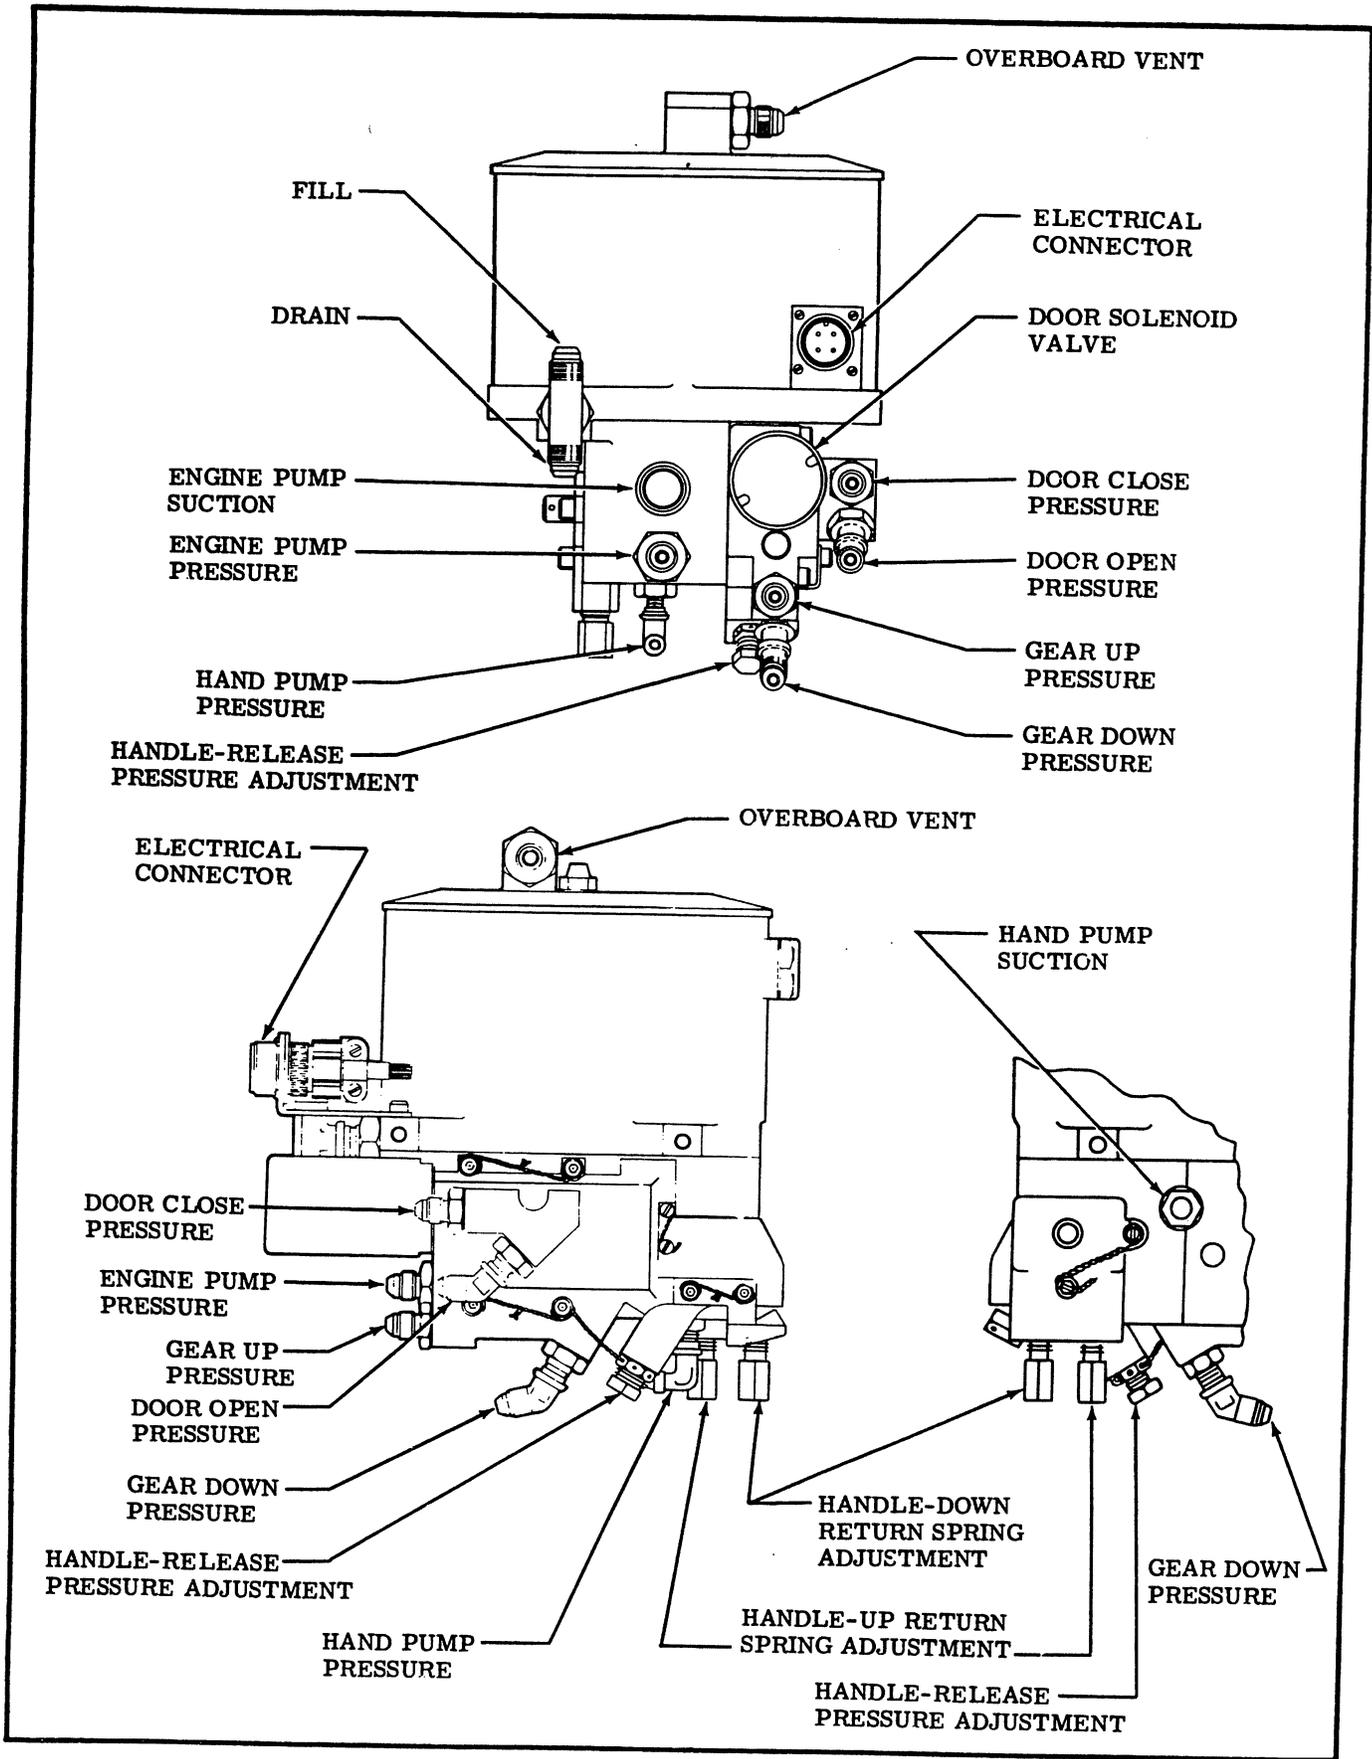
Location of Power Pack Fittings (Sheet 1 of 2)
